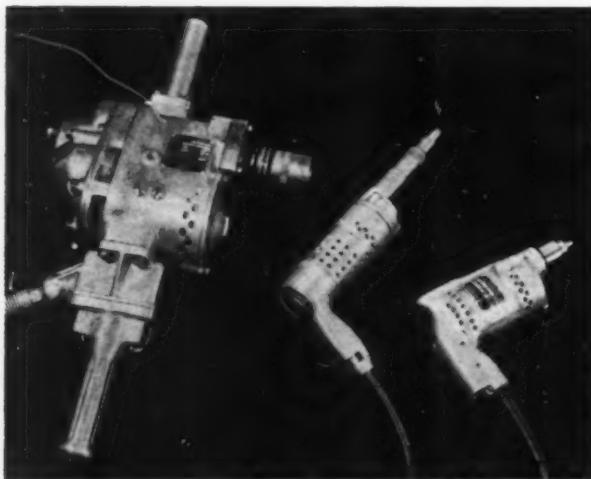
PORTABLE TOOLS USING CAST MAGNESIUM HOUSINGS AND HANDLES
